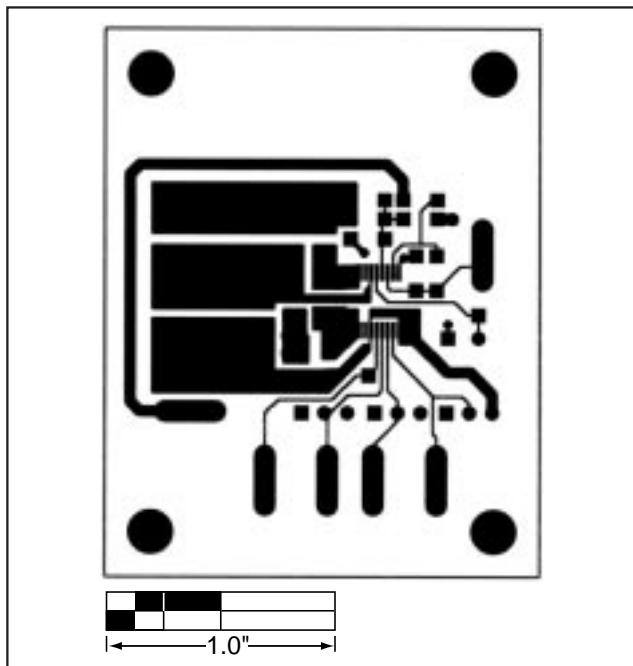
MAX685 EV Kit PC Board Layout—Component Side
